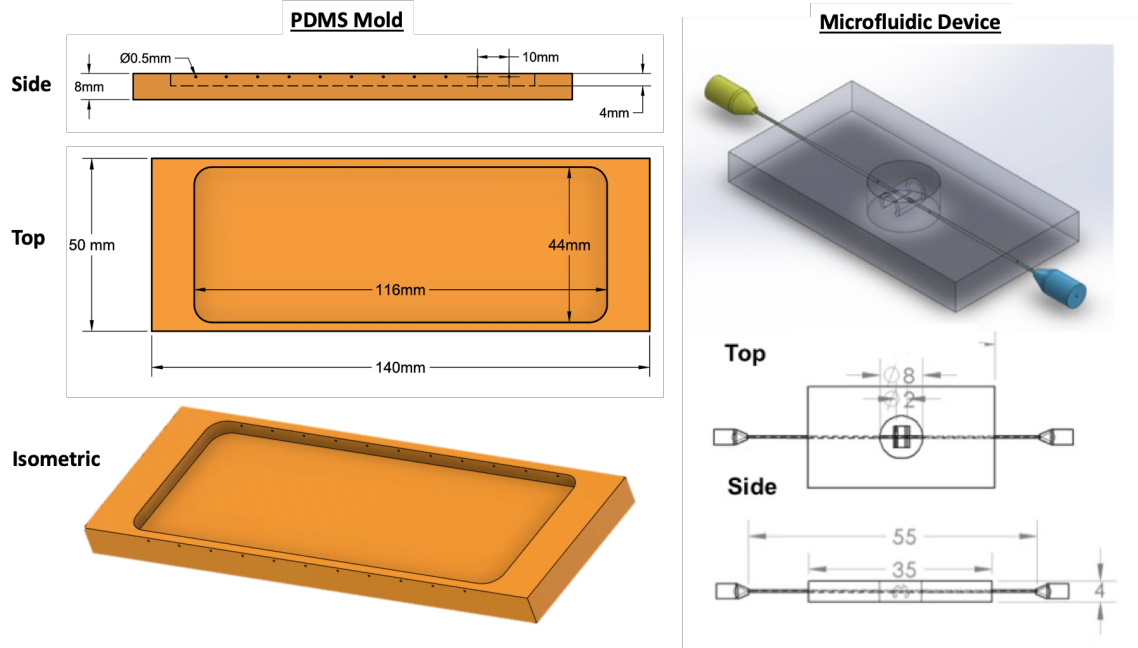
Dimensions for the 3D-printed mold and completed microfluidic device
